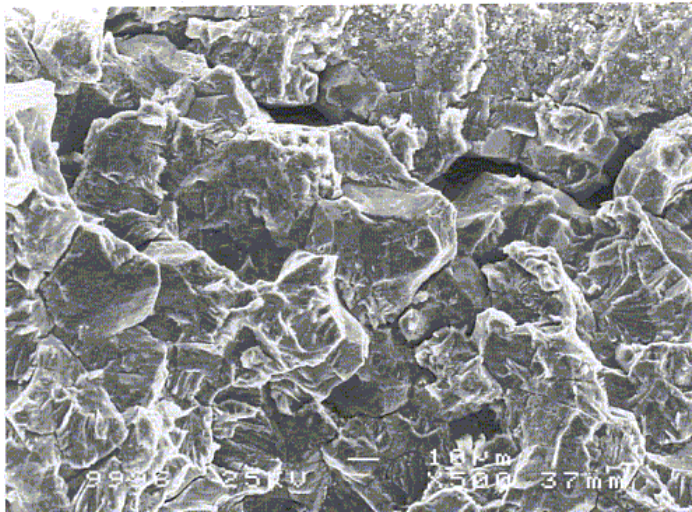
Fracture surface morphology of AISI 321 steel specimen tested using a low displacement rate showing mixed intergranular and transgranular cracking (specimen No. 5, tested using the displacement rate of 3.0×10^{-7} mm/s).
